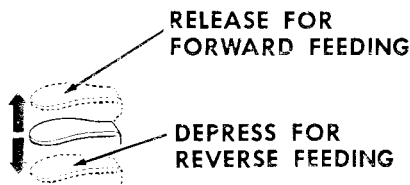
Reversing the Feeding Movement on Machine 331K4
